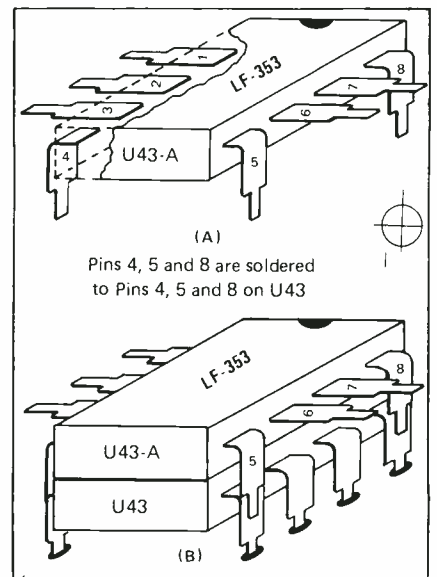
After straightening pins 1-3, 6 & 7, solder pins 4, 5 & 8.
